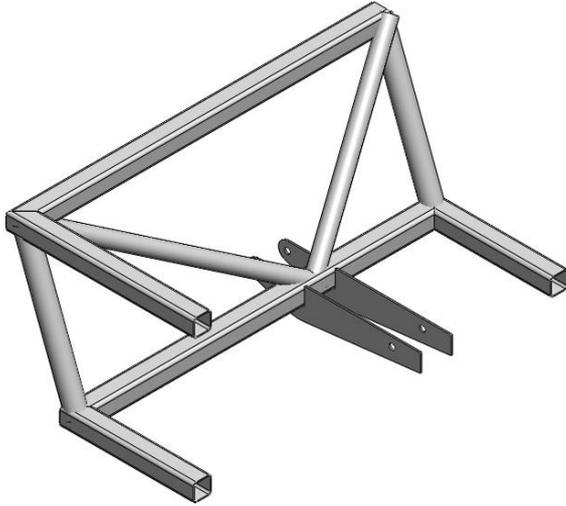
3mm Laser cut plate steel sections to mount spring and rocker
